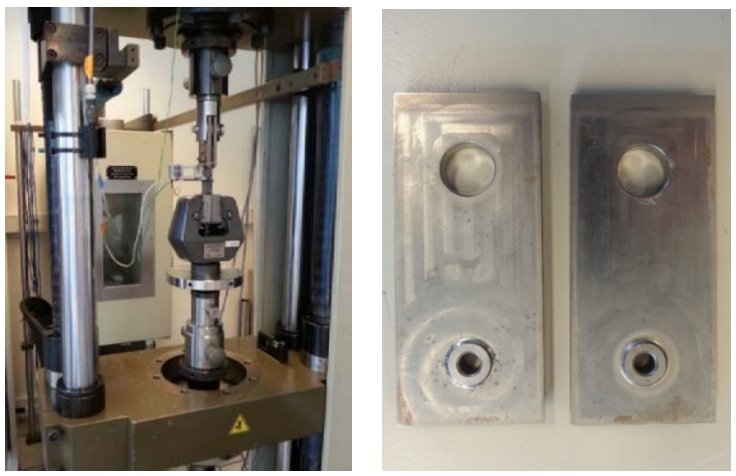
Test setup at TenCate and loading plates with bearing samples
